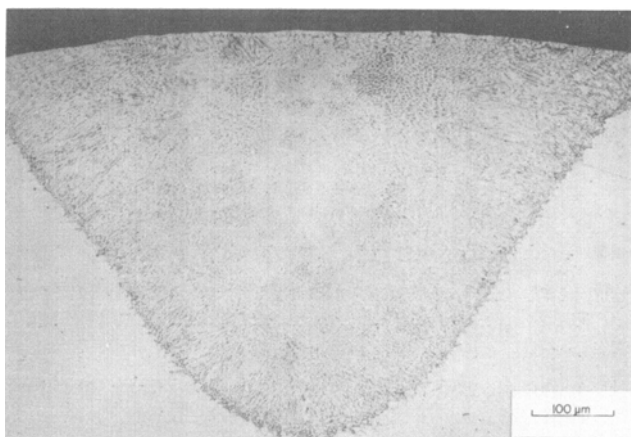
Representative micrograph of the fusion zone, indicating a virtually continuous weld bead: 200 W, 50.4 cm/min.
